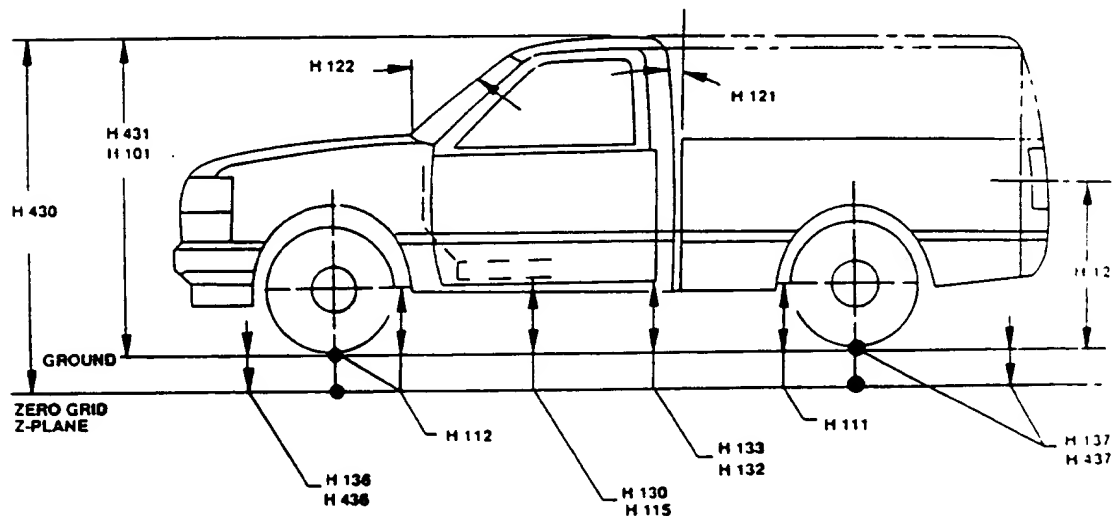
TRUCK EXTERIOR DIMENSIONS, HEIGHT
